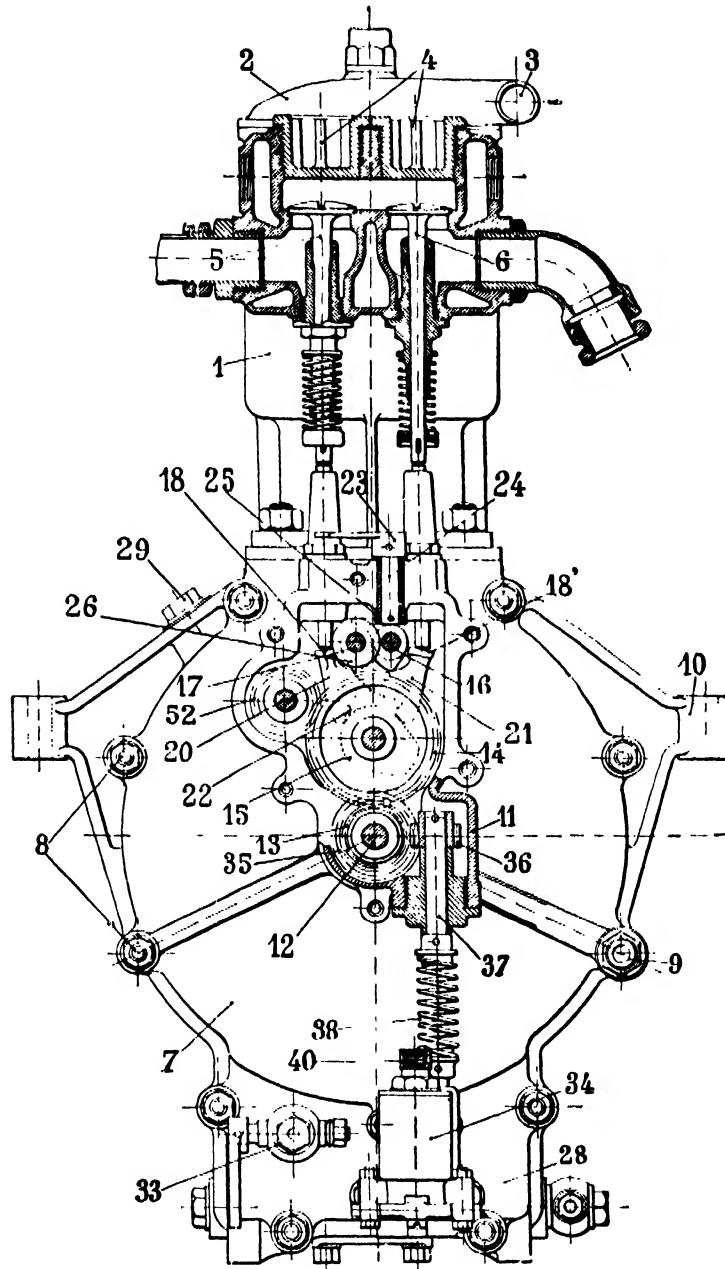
Side Elevation De Dion-Bouton Single-cylinder Engine
